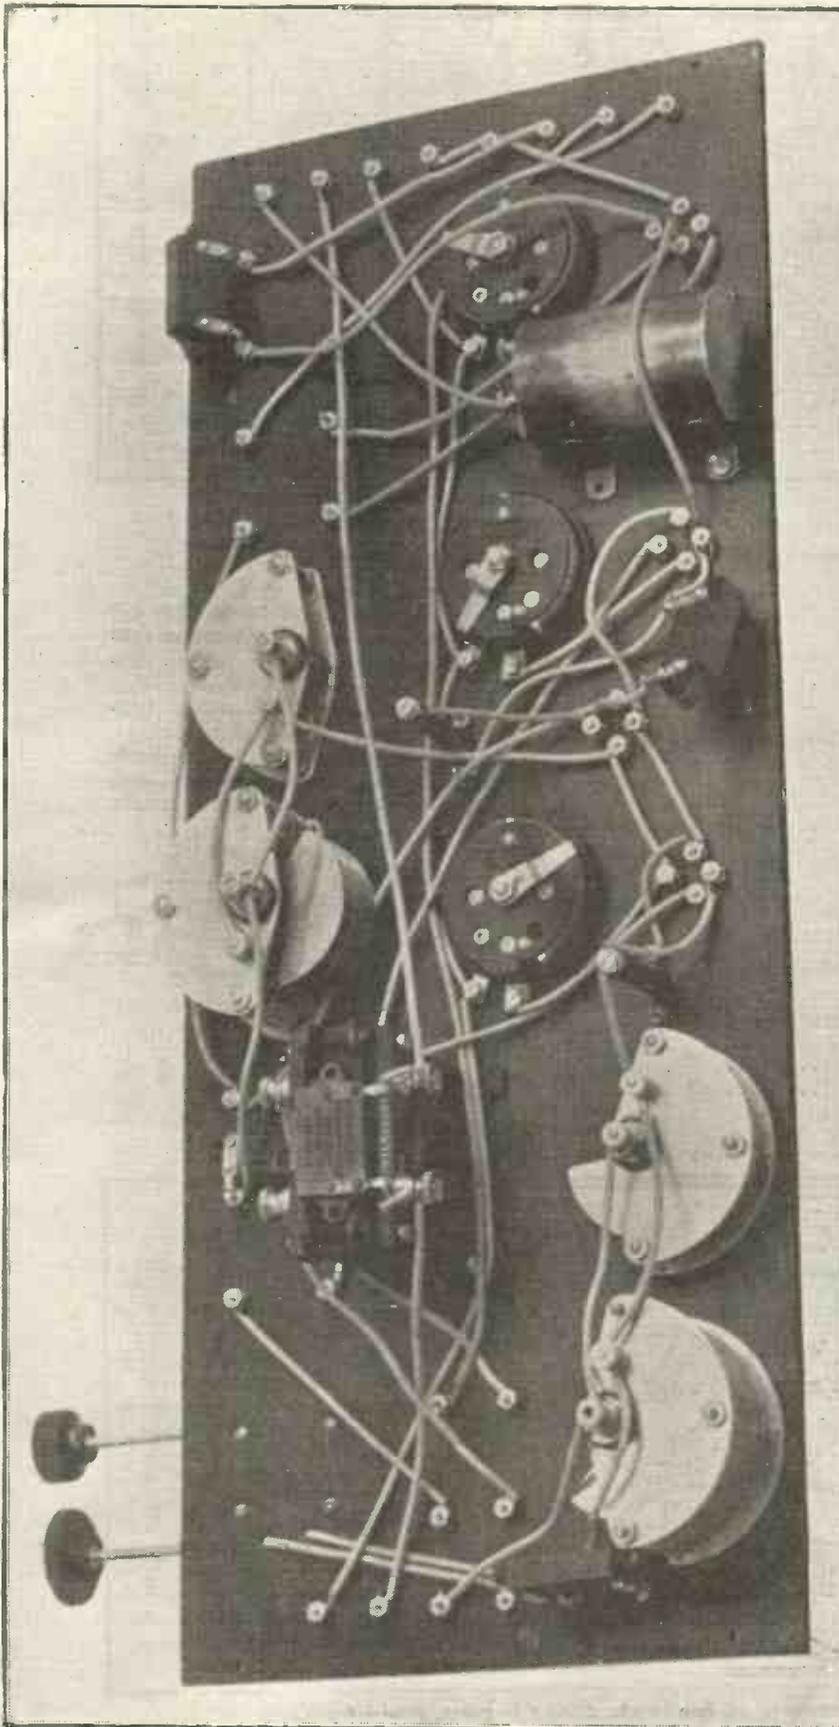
The back of the panel, showing the wiring. This photograph is approximately a third full size.
